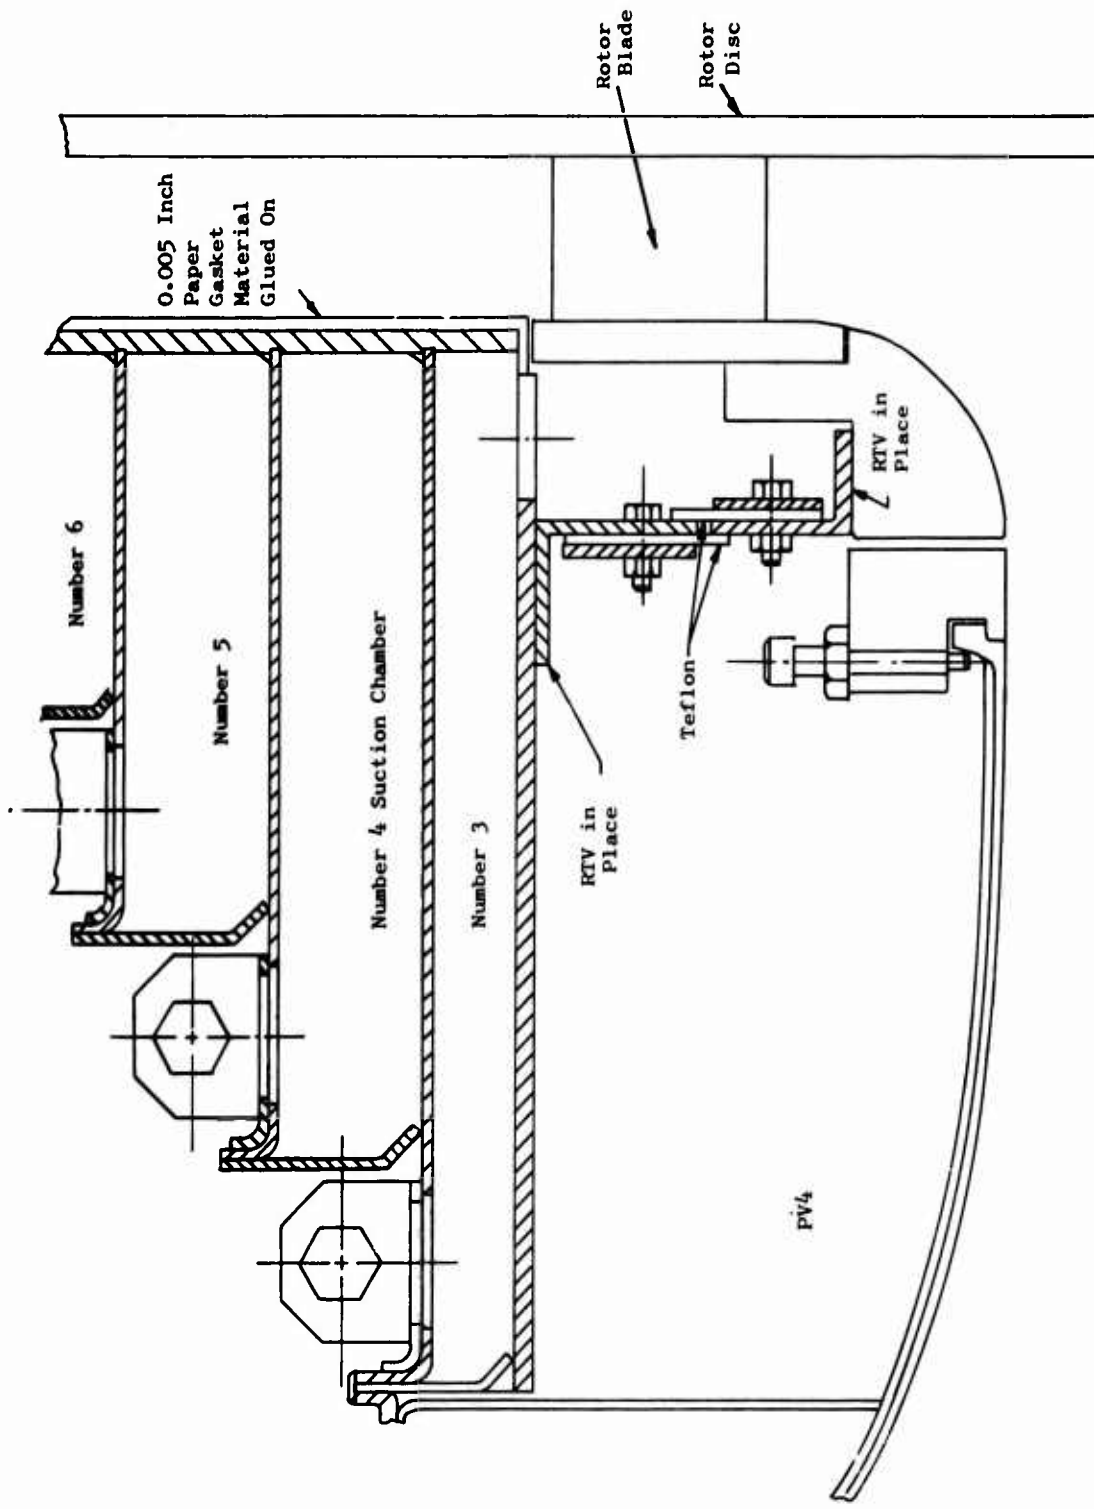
Details of Teflon Seals Installed in Low-Speed Compressor Between Rotor and Blade Chambers.
